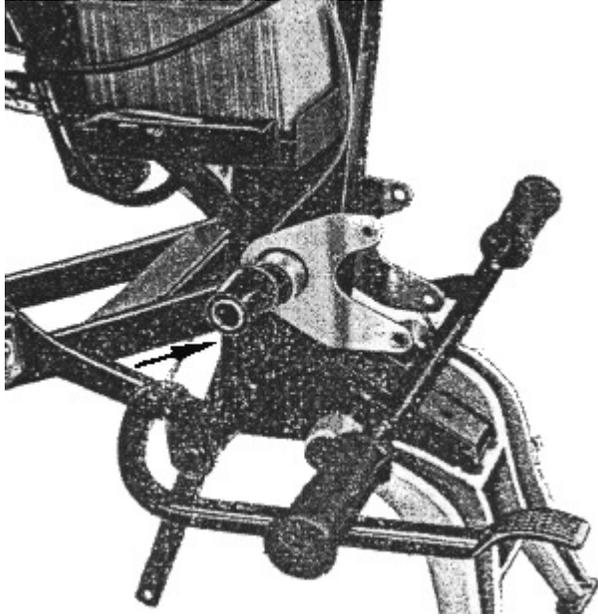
Push the rear wheel swing arm in place in the direction of the arrow head, the pressure rings are already removed
